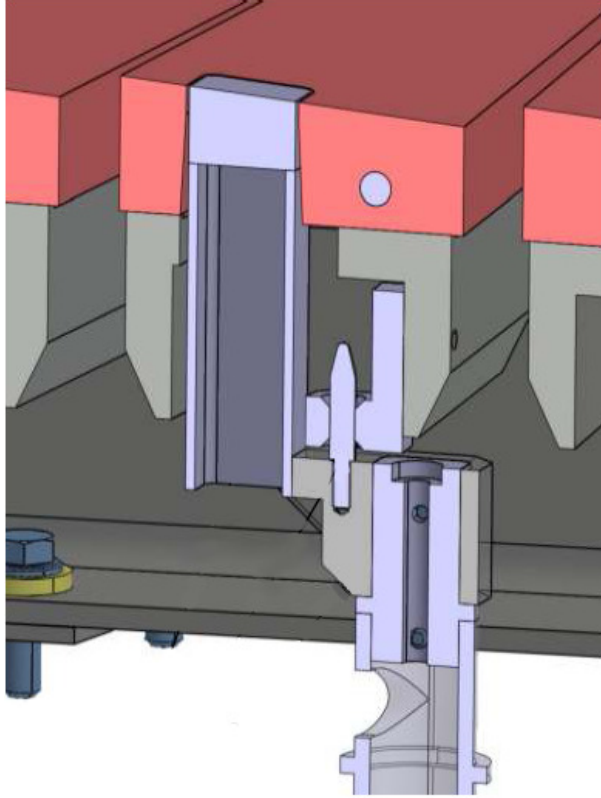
Cutaway of dummy injector head in place in the MAST divertor.
